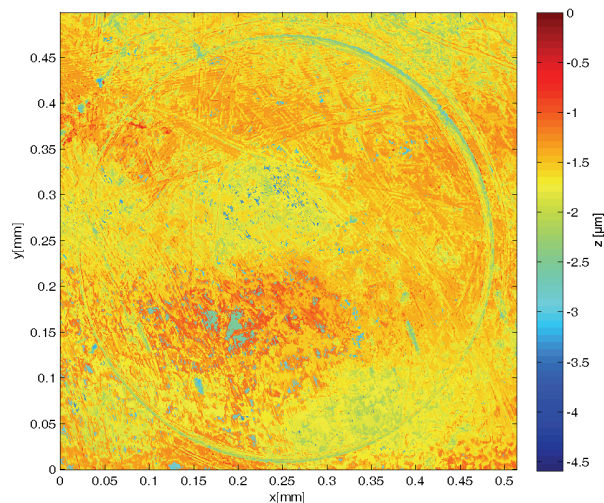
Surface topography after tool-workpiece contact for speed of 21 000 RPM and 0.5 mm tool diameter
